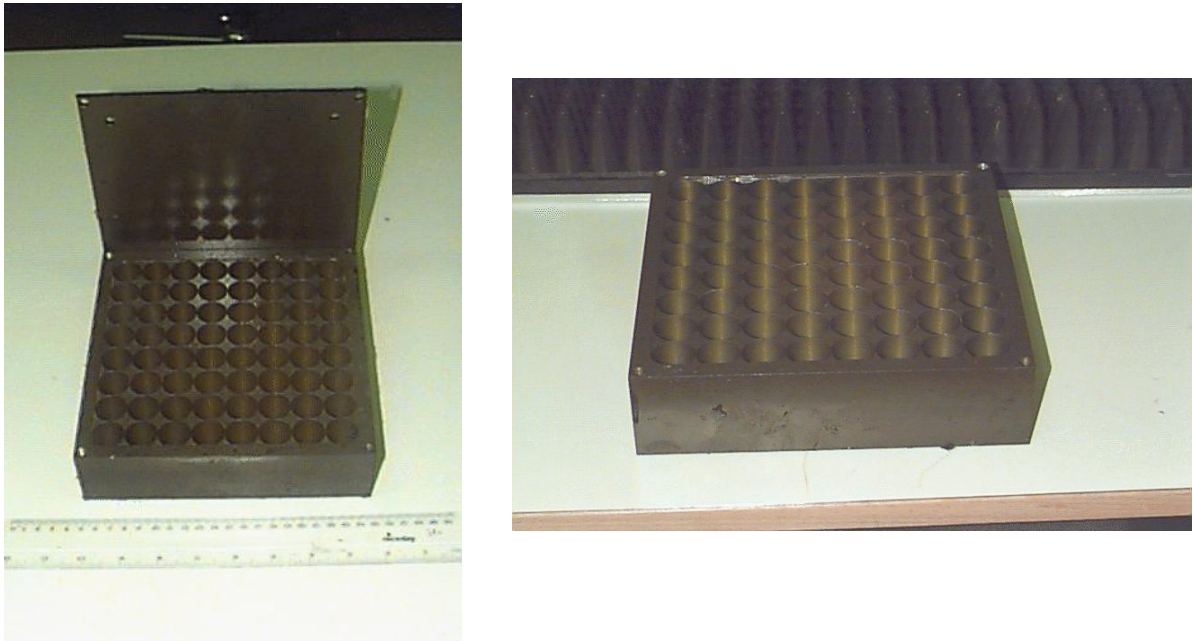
The anodised aluminium mould used to manufacture the anechoic cone layer
